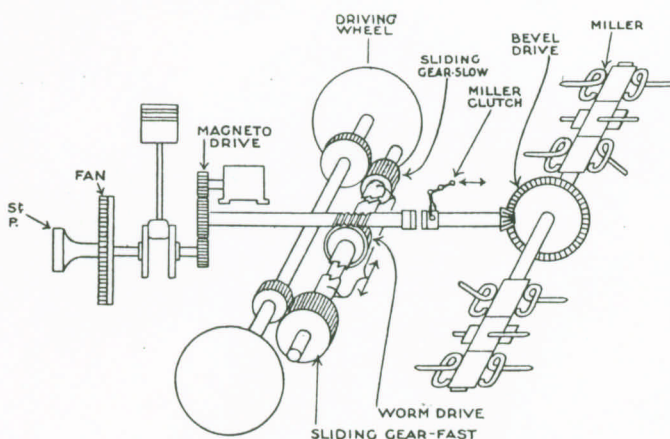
DIAGRAM SHOWING ARRANGEMENT OF THE GEARS OF THE MACHINE.
